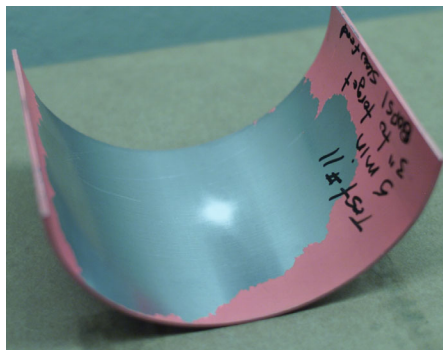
Painted aluminum part blasted at 80 psig for 5 min.
